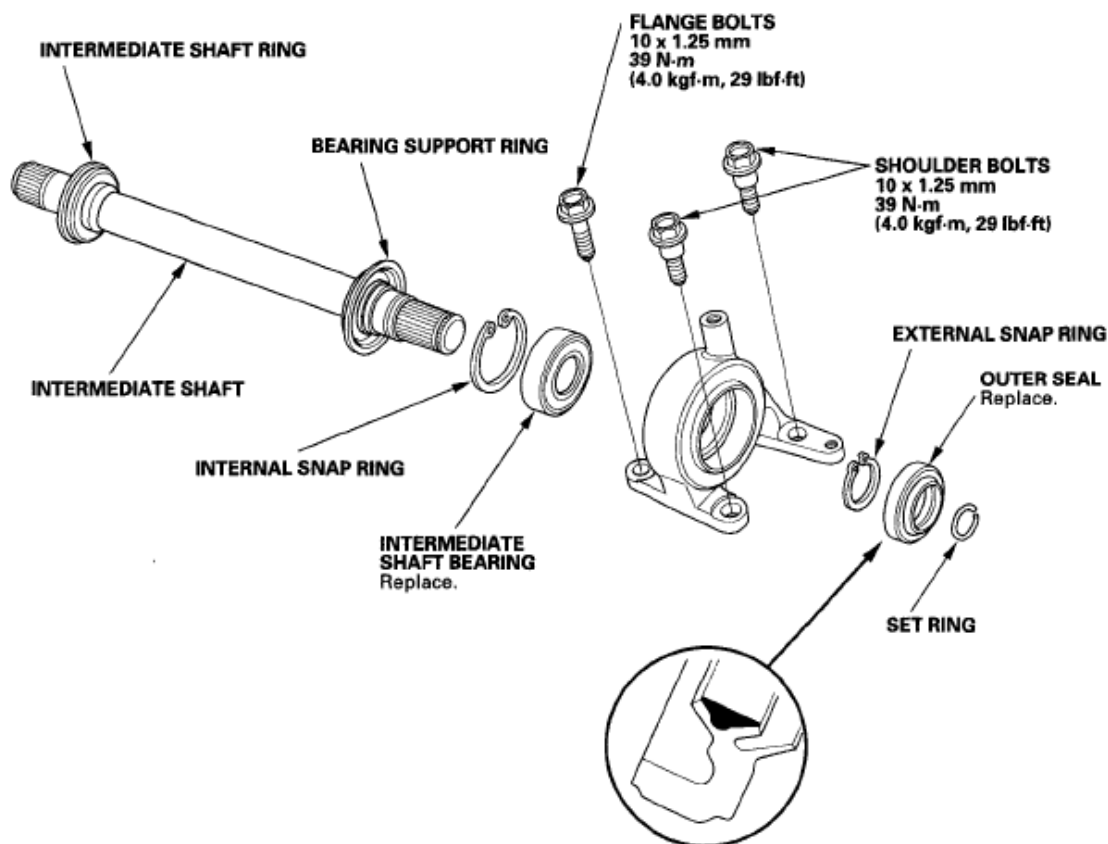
Exploded View Of Intermediate Shaft - 6-Speed M/T Model (Si) With Torque Specifications
